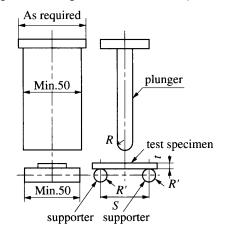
Jigs for Roller Bend Test (Unit: mm)
